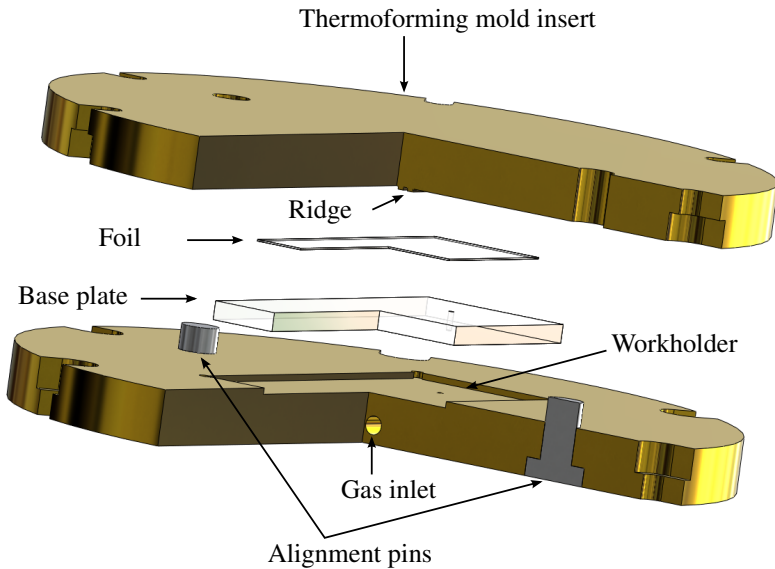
Three dimensional model of the thermoforming process, consisting of a mold insert with workholder, a base plate with drilled channels, a thin foil and a microthermoforming mold insert with bonding area.
